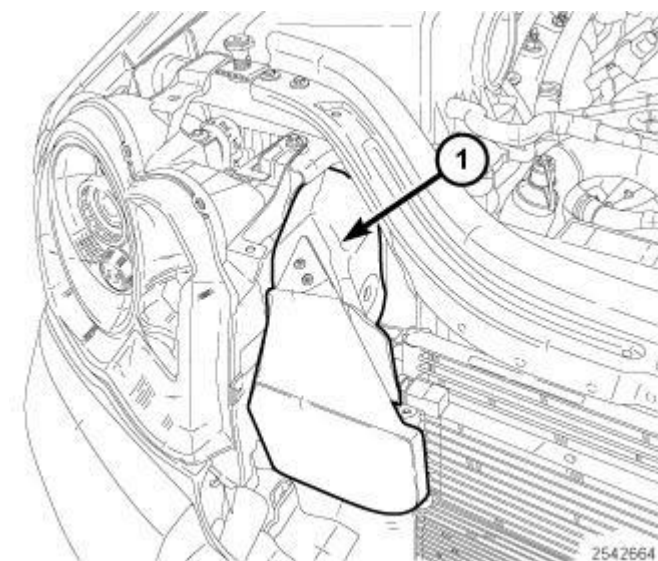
Lifting Housing Assembly While Rotating Up Toward Engine
